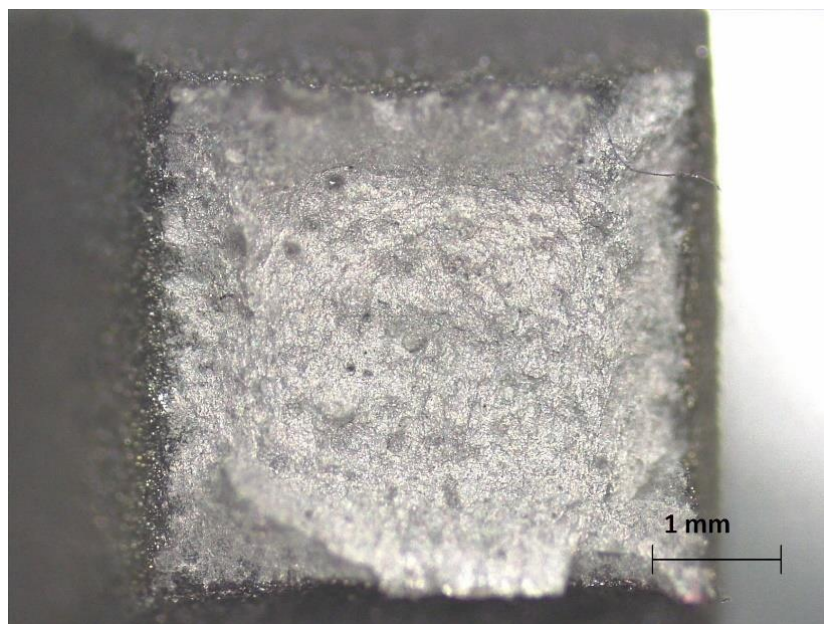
Fracture surface of Ti6Al4V tensile specimen by stereomicroscope.
